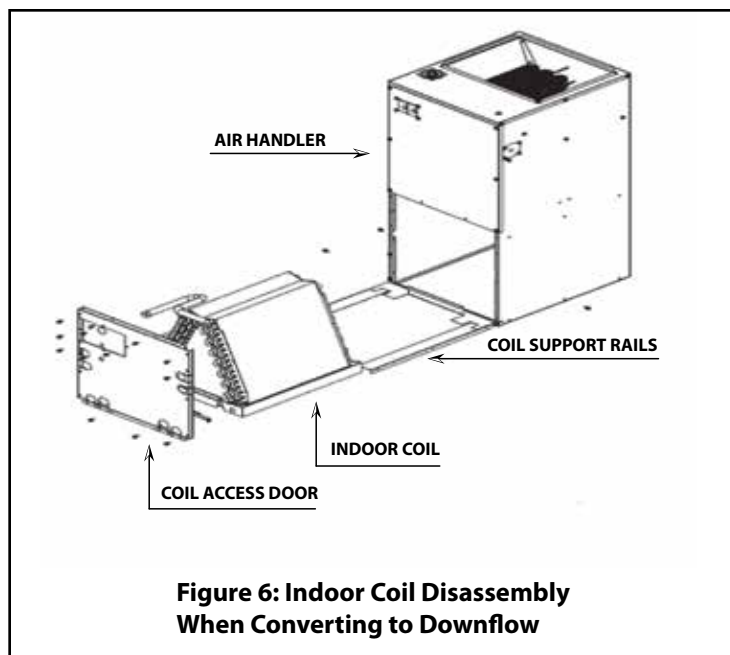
Indoor Coil Disassembly When Converting to Downflow
